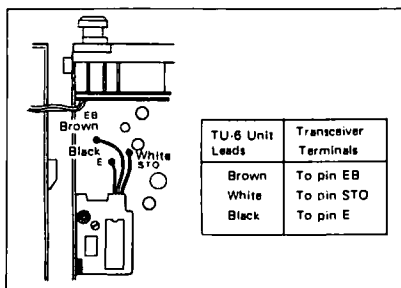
Placement of the TU-6 CTCSS assembly. The assembly is soldered in two places and secured with one screw.
